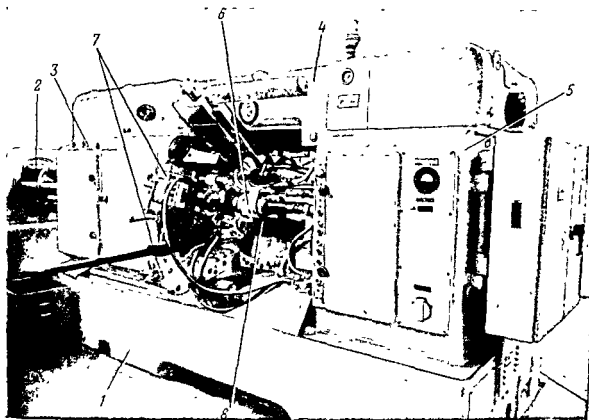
Six-spindle horizontal automatic bar machine, model 1265M-6
